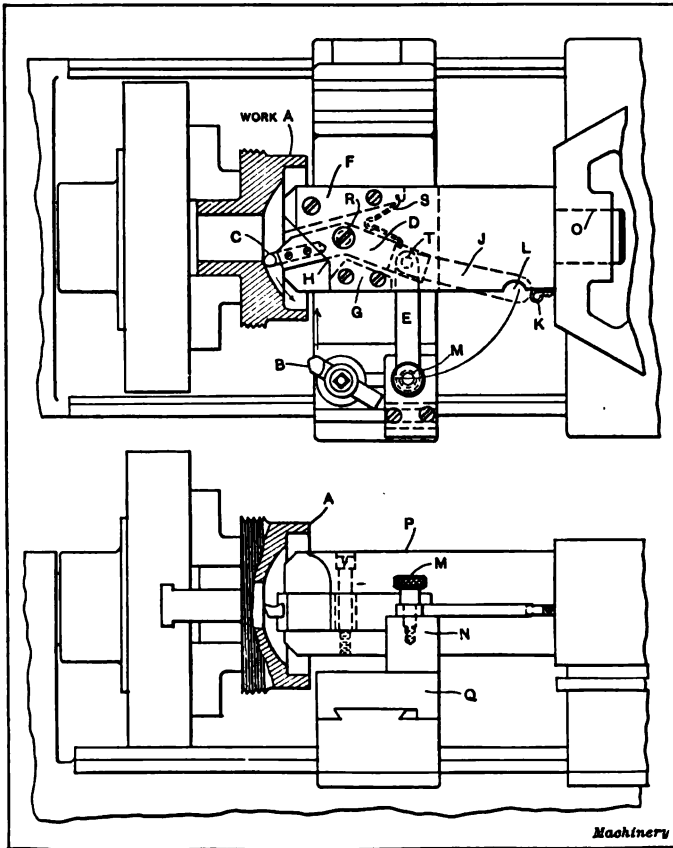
Turret Lathe Attachment for turning Concave Seat
